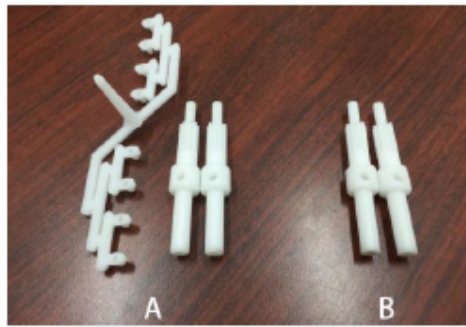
(a) & (b) Parts and wastes produced by using traditional cold runner
